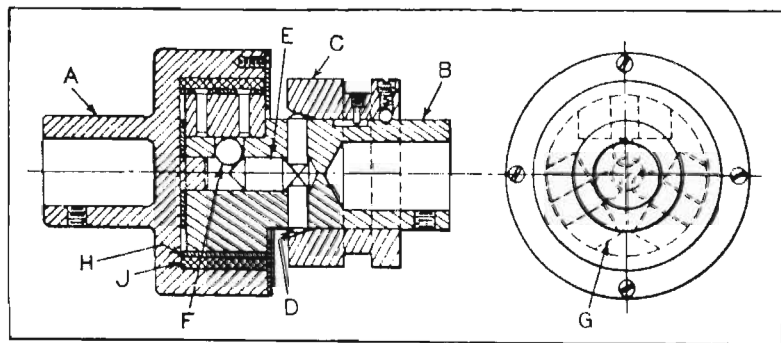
Modified Design of Clutch Shown in Fig. 11
